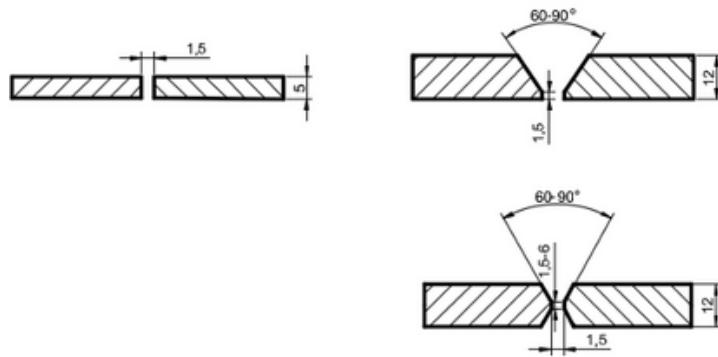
Weld Groove Shapes and Dimensions Used in Aluminum Welding
